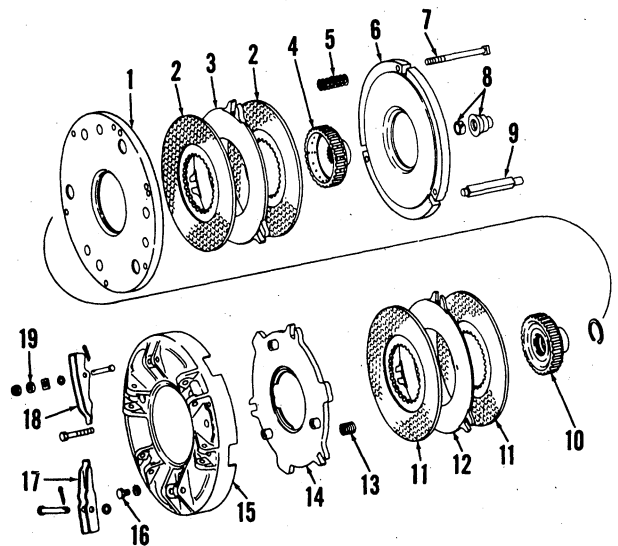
Exploded view of Perma-Clutch assembly used on tractors equipped with Quad-Range transmission. On 4650 models, three separator plates (3), four traction clutch discs (2), two separator plates (12) and three pto clutch discs (11) are used.
